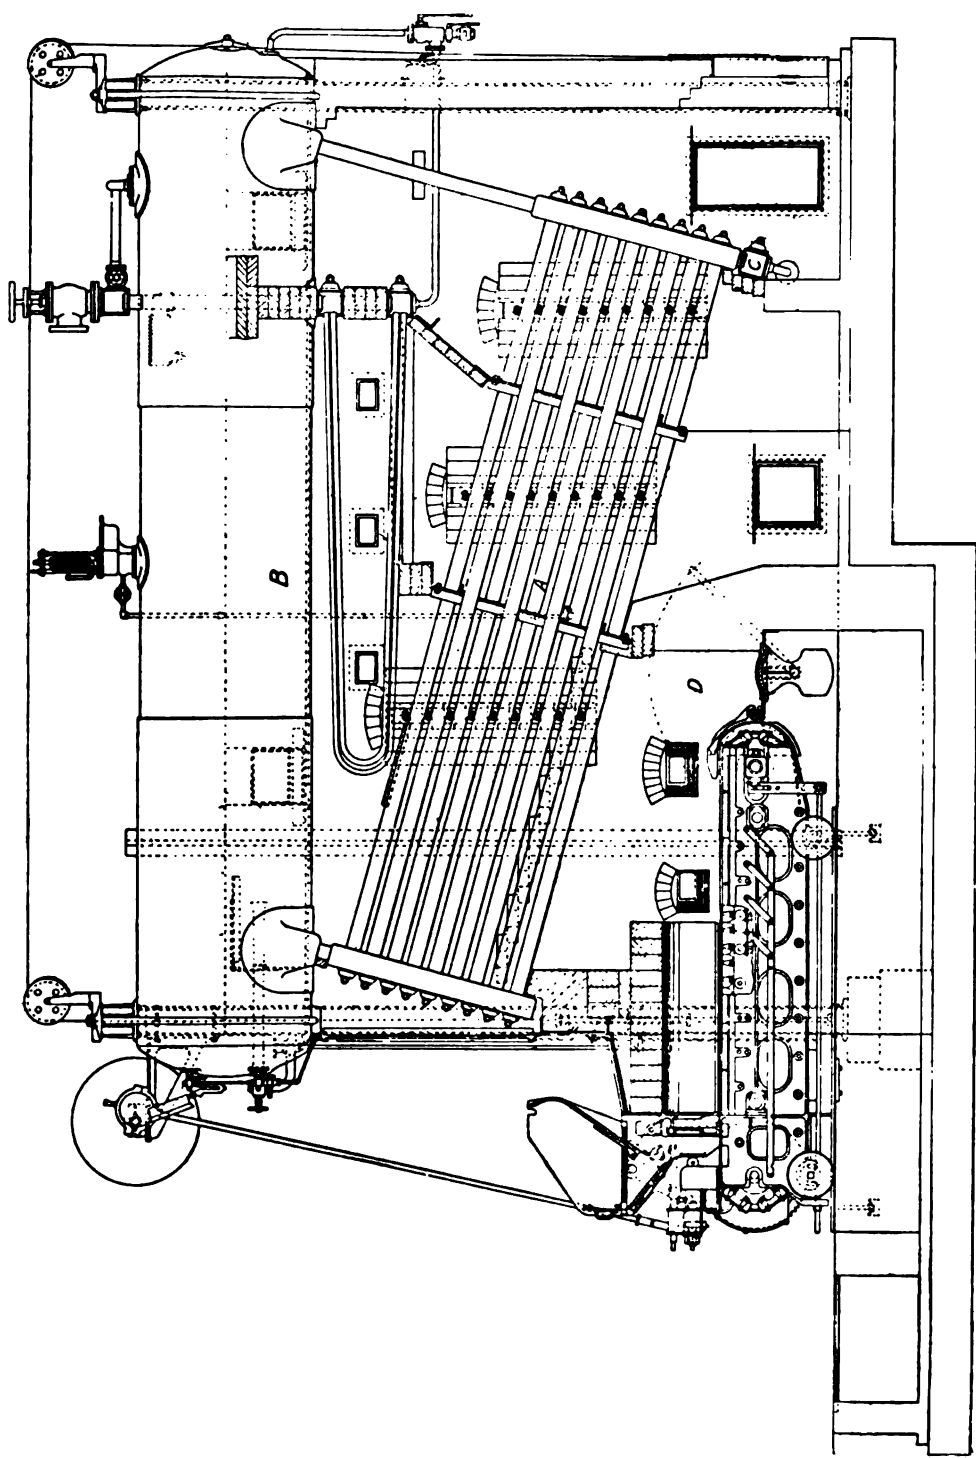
Babcock & Wilcox Boiler fitted with Mechanical Stoker. (Longitudinal Section.)
